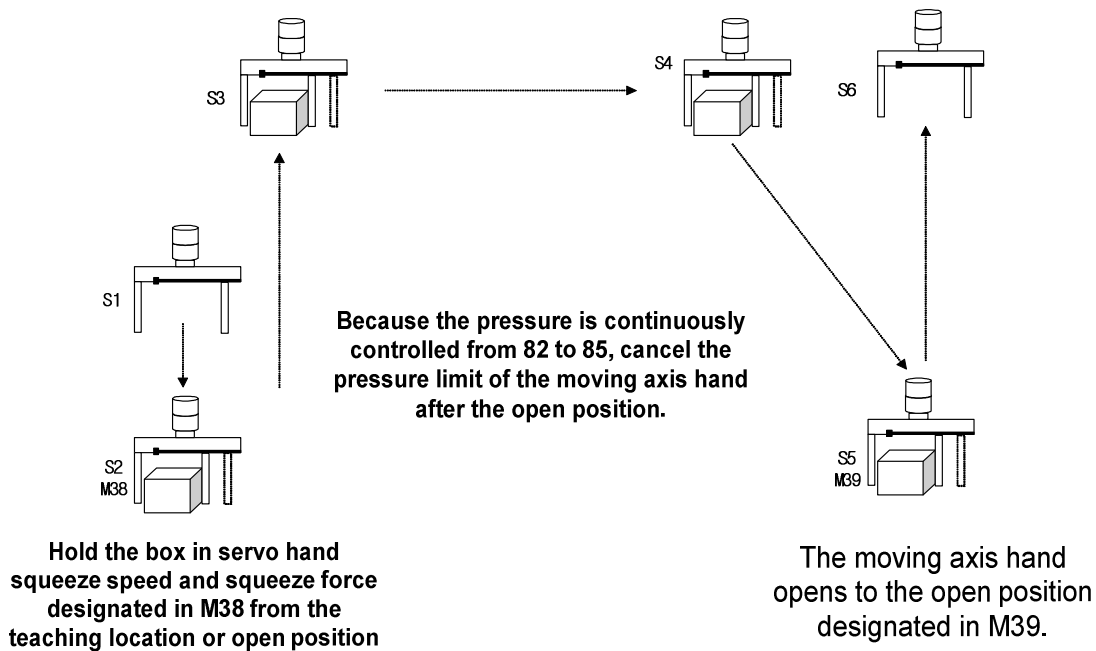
Servo Hand Squeeze/open for Workpiece Handling
